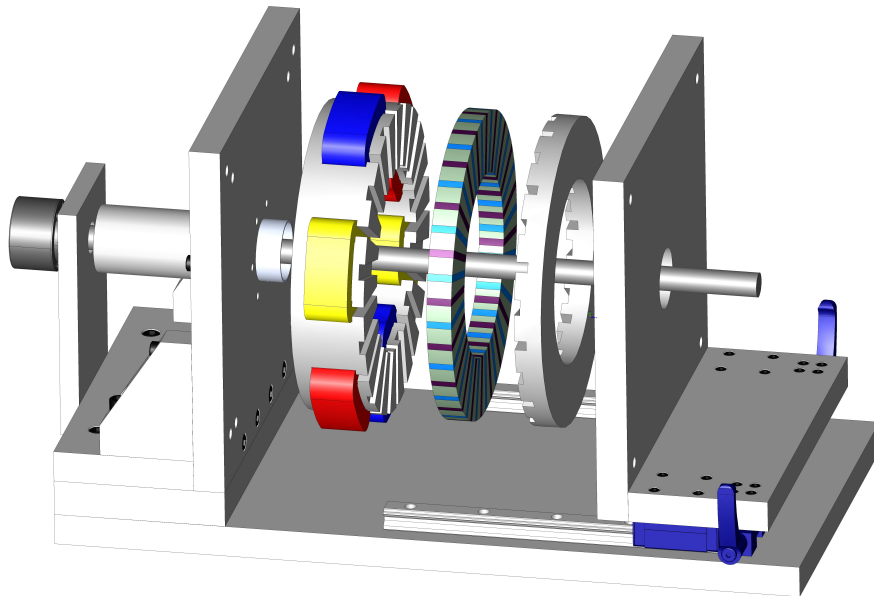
Exploded view of the computer-aided design (CAD) model for the MAGNUS motor on a testing fixture.
